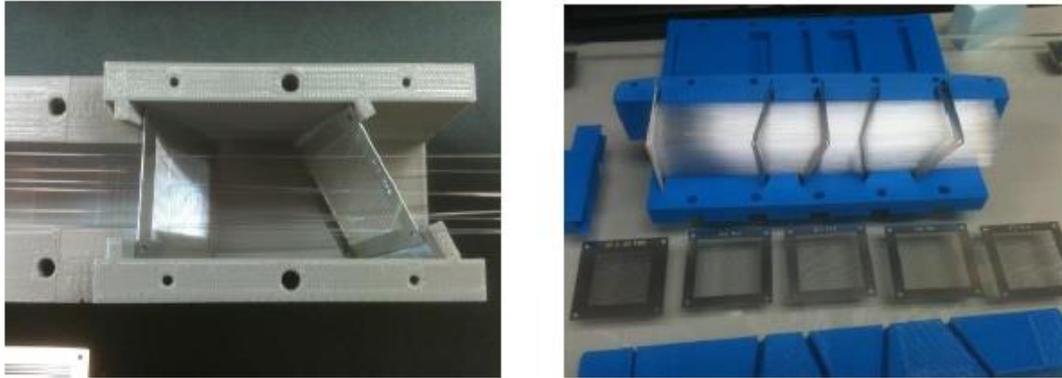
Left: Fibers inserted through two angled wire frames in a prototype mold. Right: Completed fiber assembly with tilted screens positioned in an actual mold in preparation for filling with tungsten powder and epoxy.
